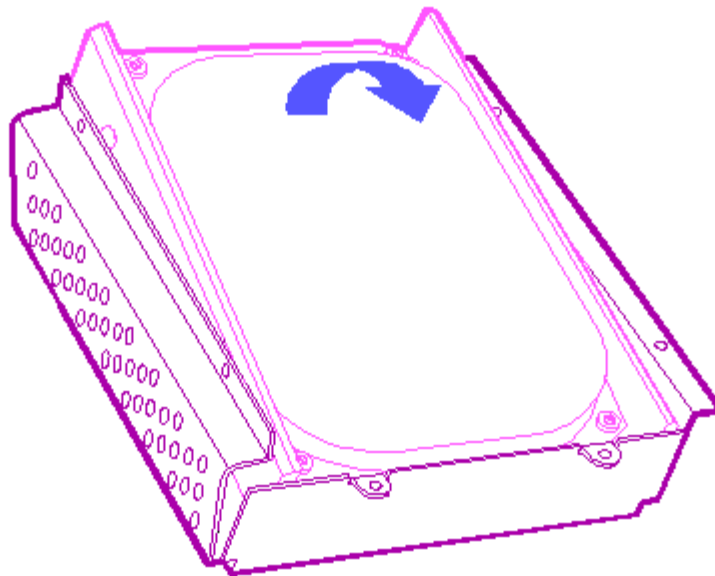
Removing the Fixed Disk Drive from the Drive Enclosure
